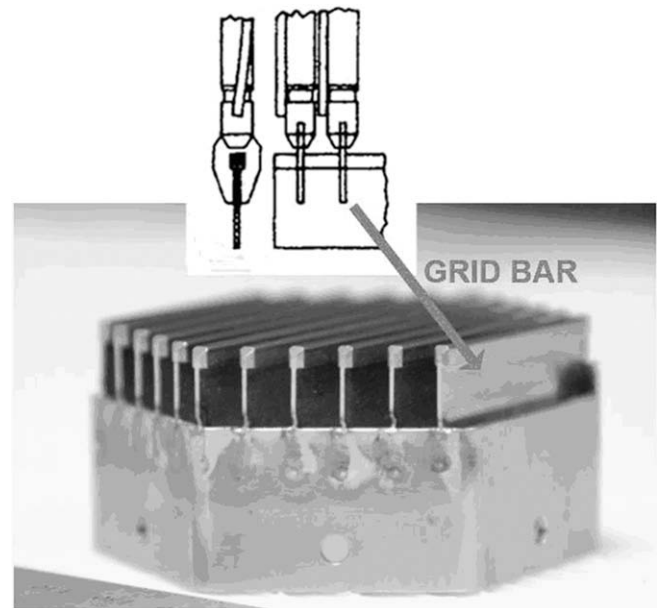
Grid bar assembly used in an EBR-II driver fuel assembly to assemble a 91-pin assembly of Mk-II fuel rods. The insert shows how the fuel pins were arranged on a grid bar using a 'spade' on the lower end plug.
